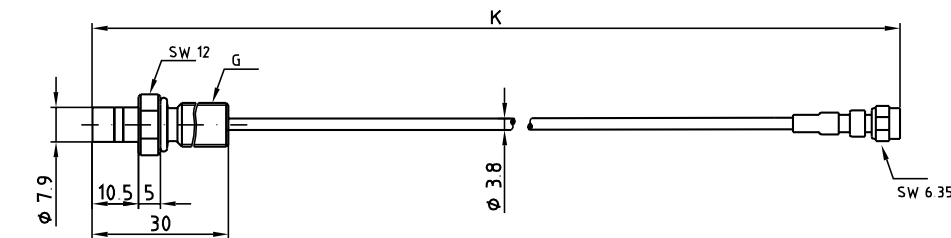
Displacement sensor DS-1053 for reverse mounting, e.g. in sensor holder AC-101
